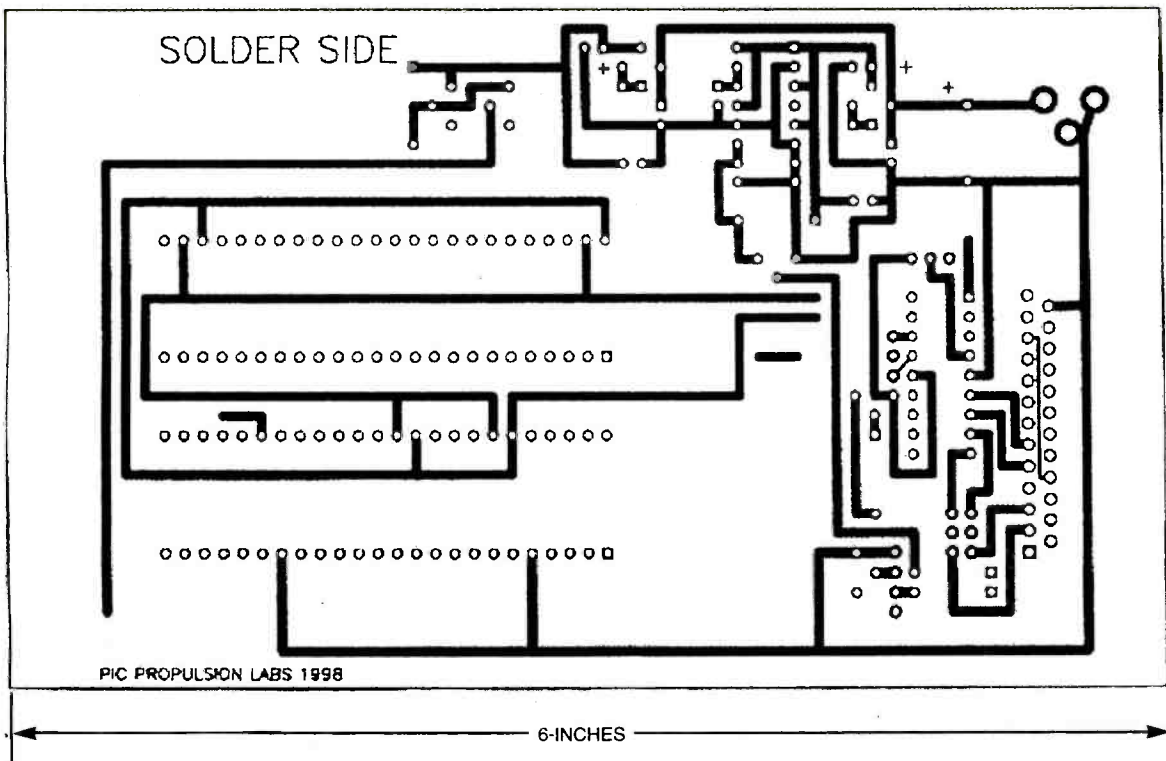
Here's the foil pattern for the solder side of the PIC Replicator PC board.
